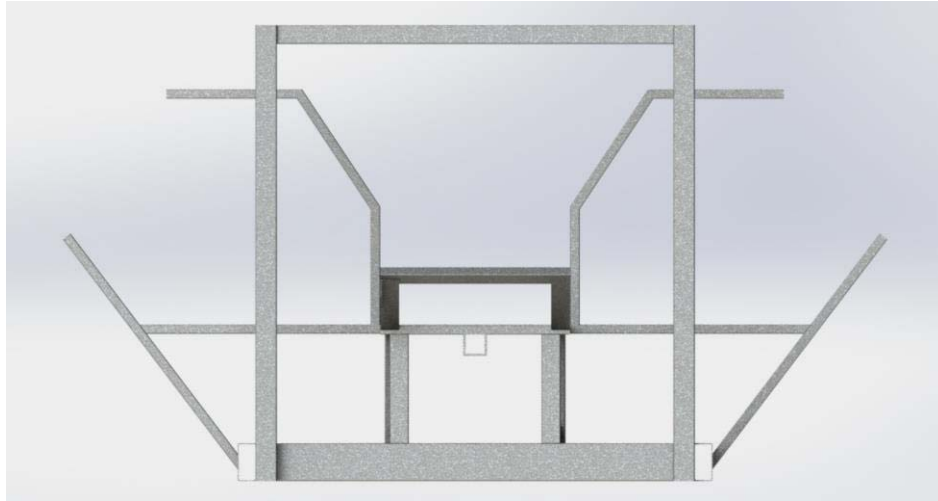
Front view render of the final ladder style frame for the Pedibus.
